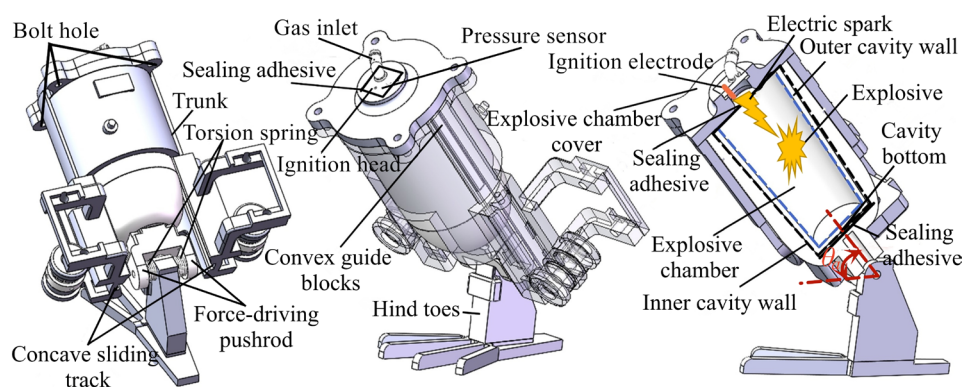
Design of soft-bodied cavity-type explosive actuator.
